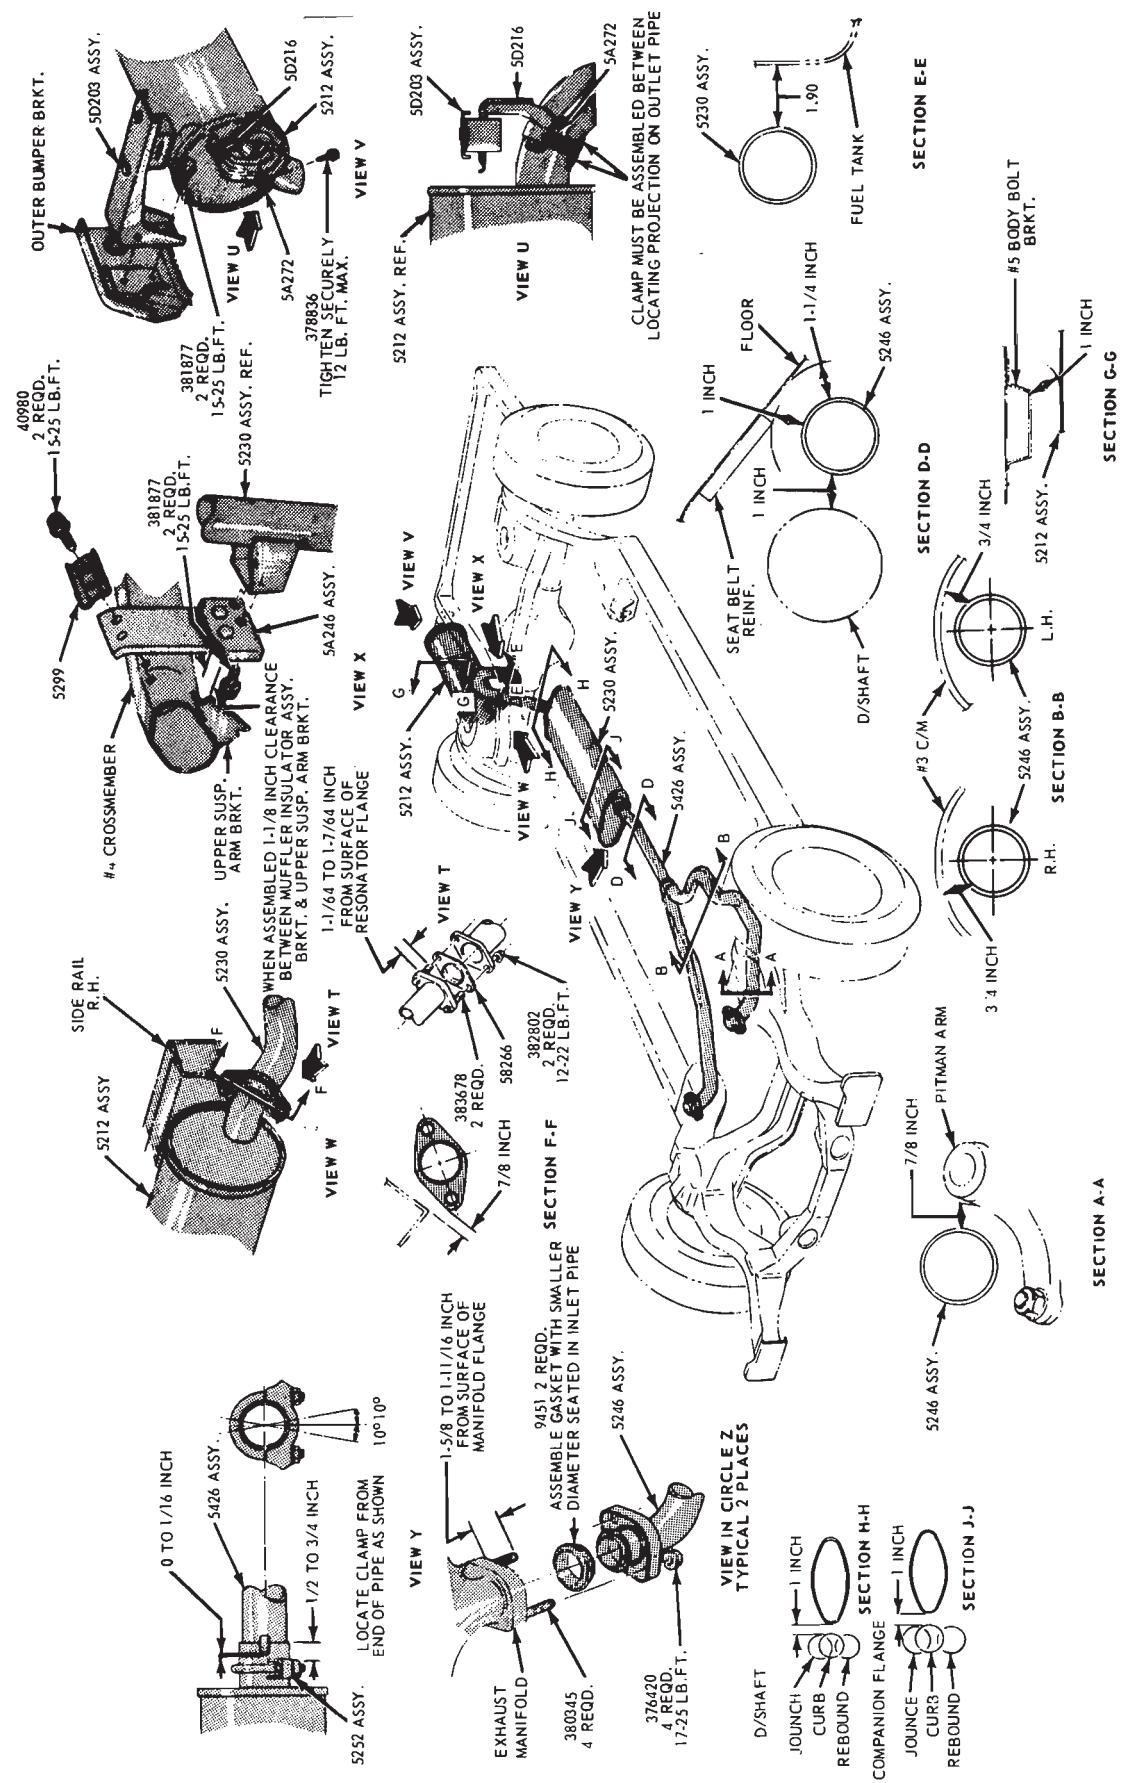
Lincoln Continental Single Exhaust System—460 Engine
